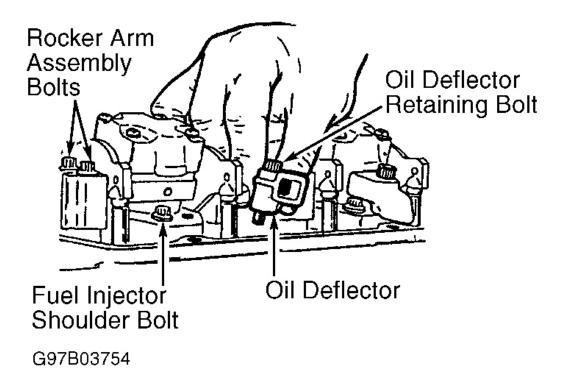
Locating Oil Deflector, Oil Deflector Retaining Bolt Fuel Injector Shoulder Bolt & Rocker Arm Bolts
